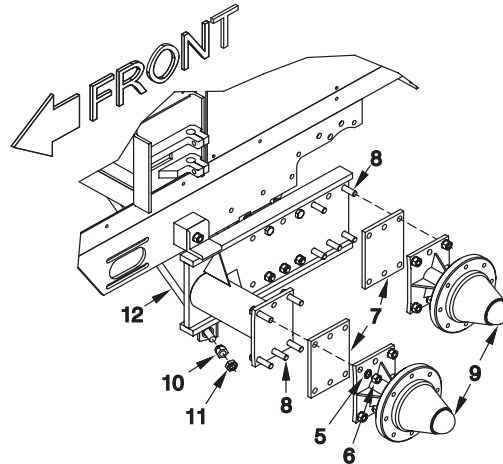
Mounting Spacer Plates Hubs & Truss Rod
